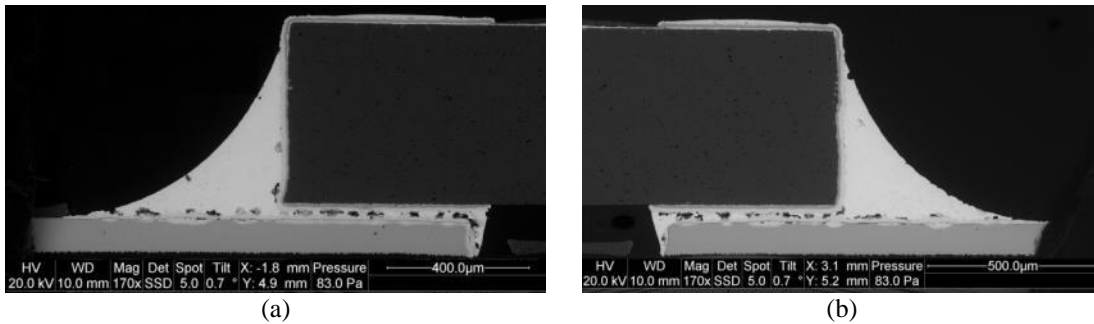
R2512 – SAC305+0.07%Ce (a) Left Solder Joint (b) Right Solder Joint after 1000 hours/200°C Aging
